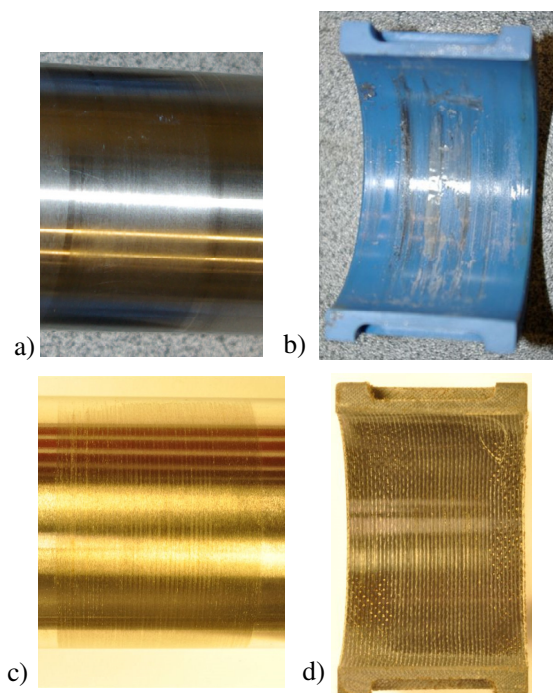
Shaft a) and bearing b) from Thordon test, and shaft c) and bearing d) from Orkot test.
